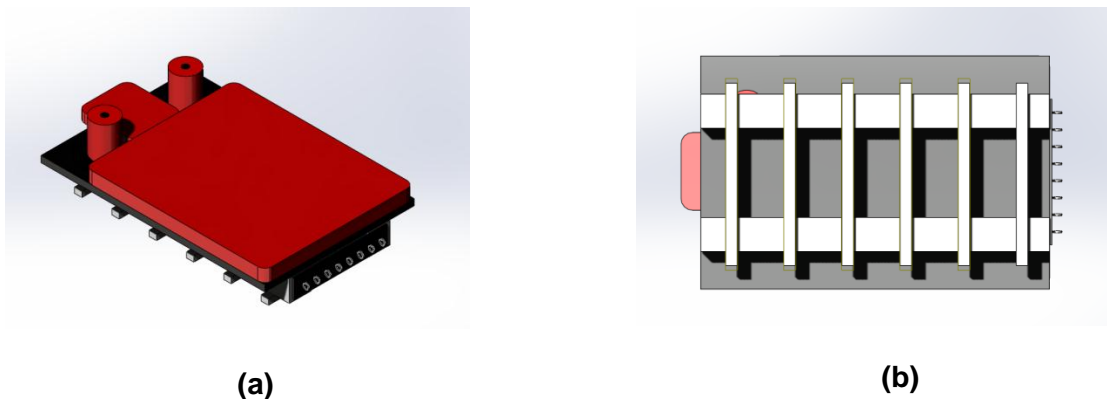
The carriage component. a) Top view shows cushioned back and headrest, shoulder supports, and set of handles. b) Bottom view shows incorporation of plastic sliders to be inserted in the plastic track
